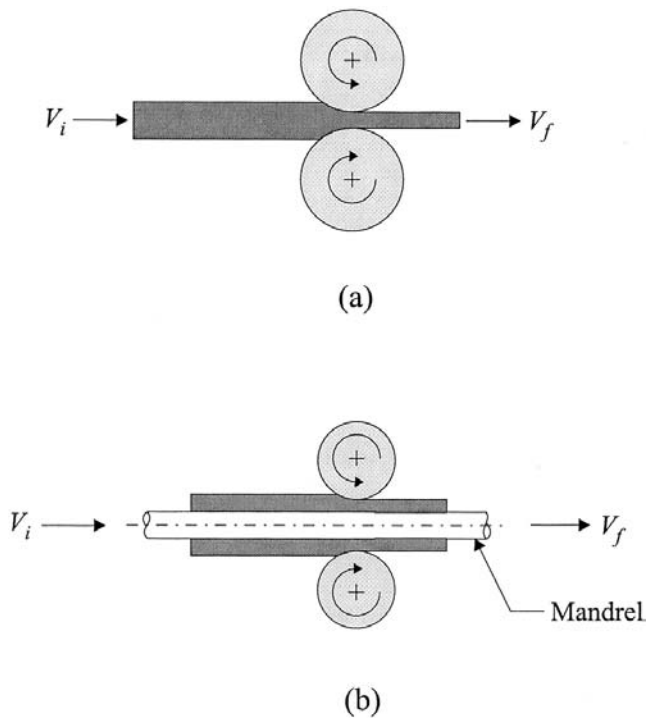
(a) Sheet rolling; (b) tube rolling.
